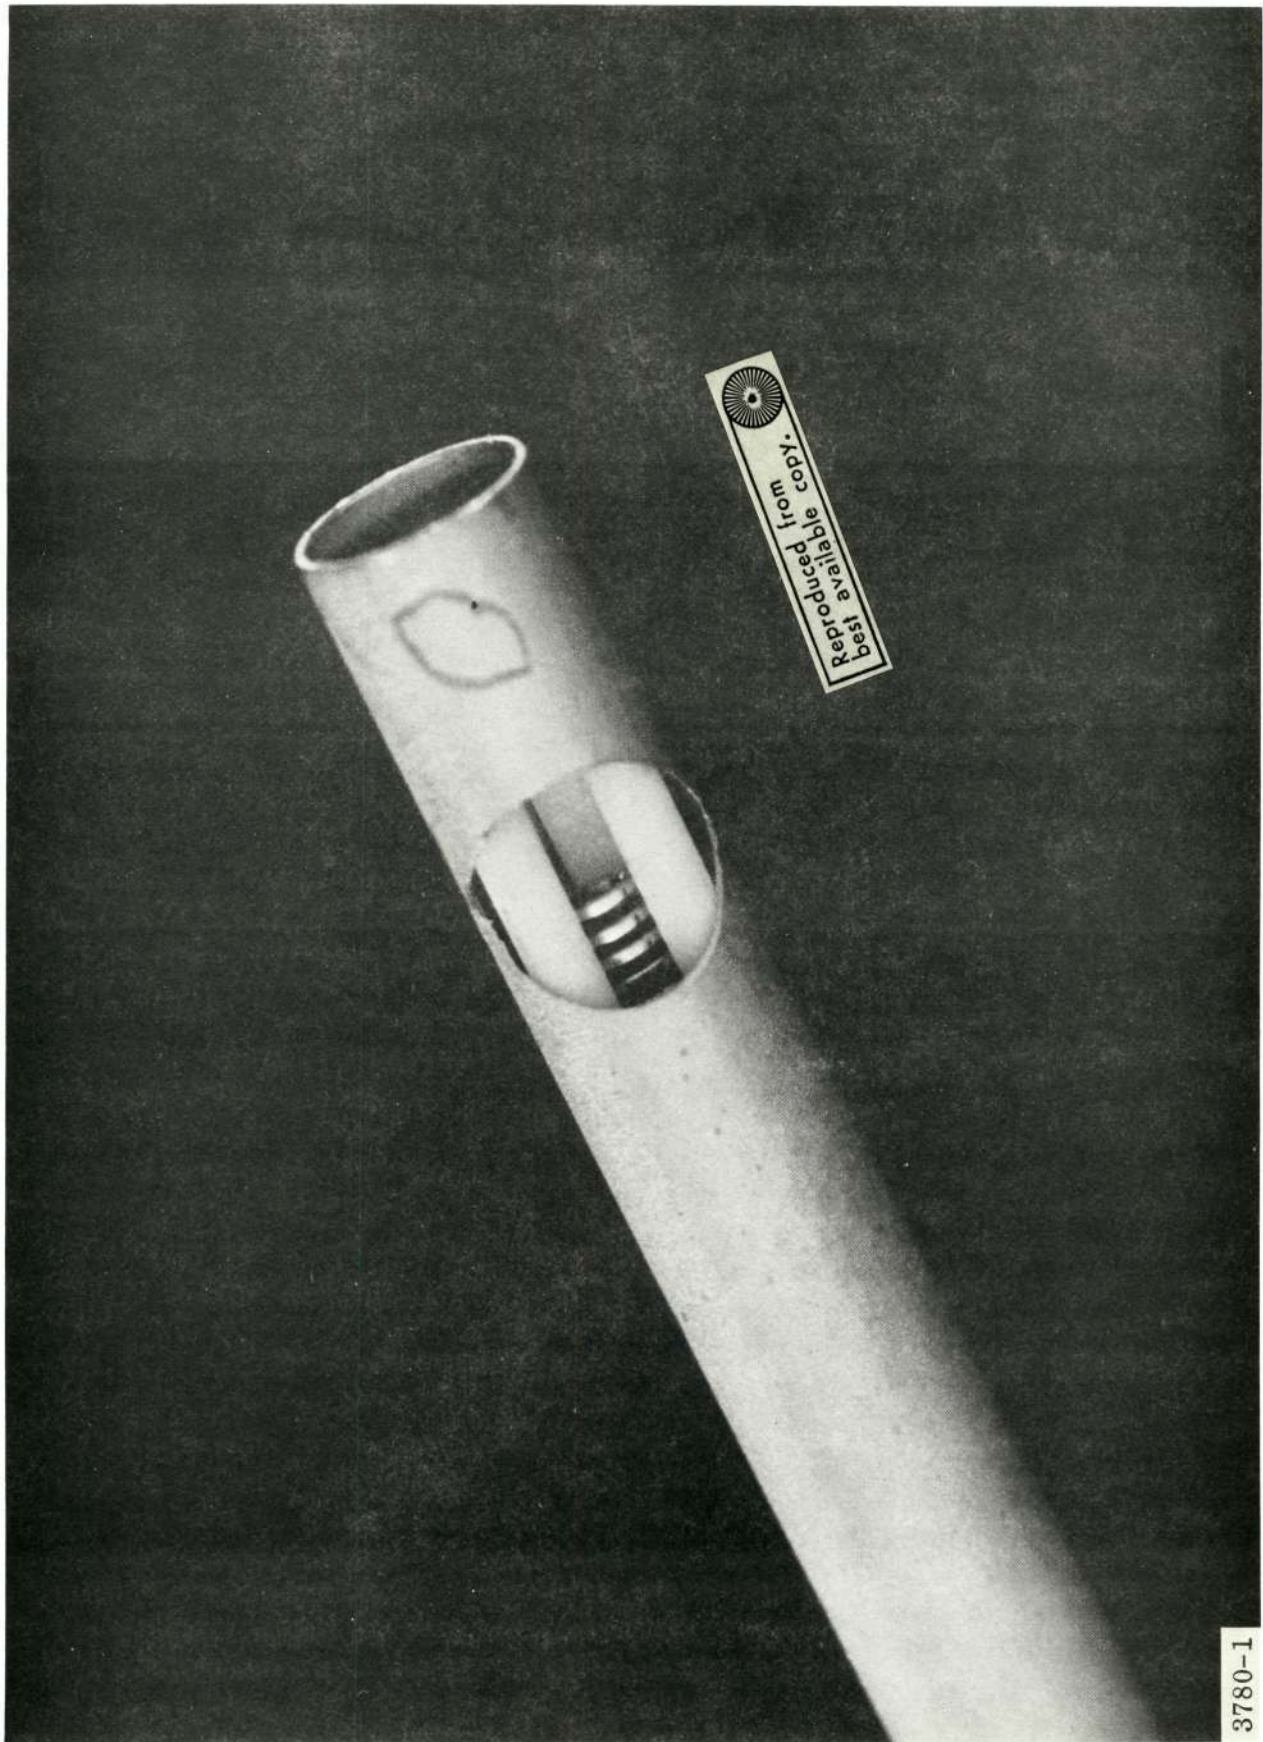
Side view of a 3 rod helix assembly showing the circular opening for the coaxial line.
